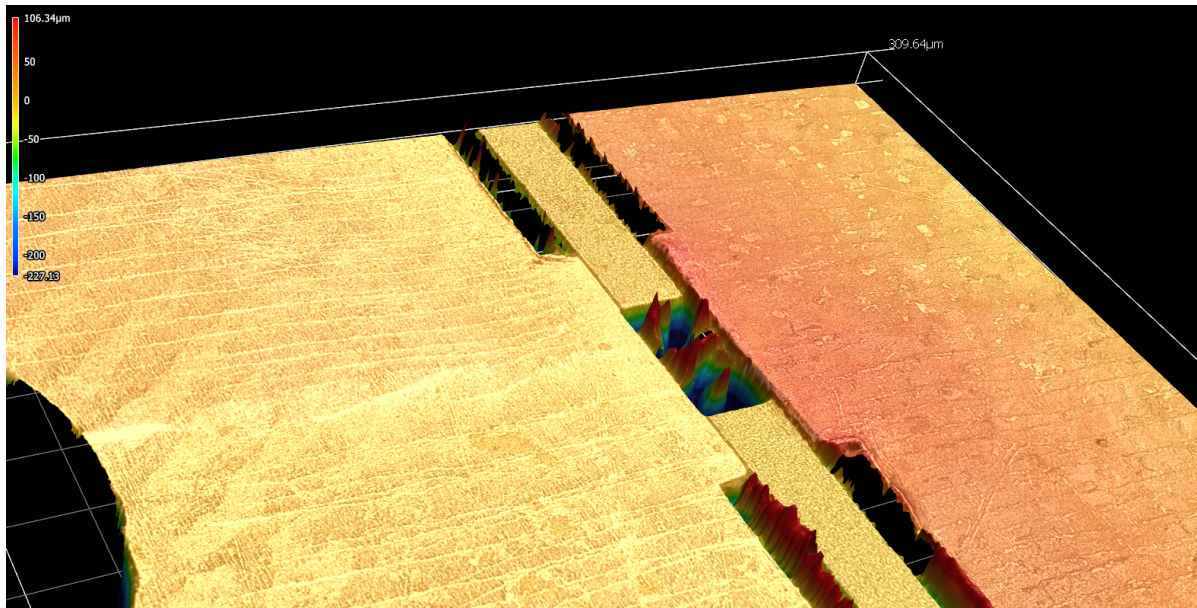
3D surface measurement of hot thruster nozzle exit area.
